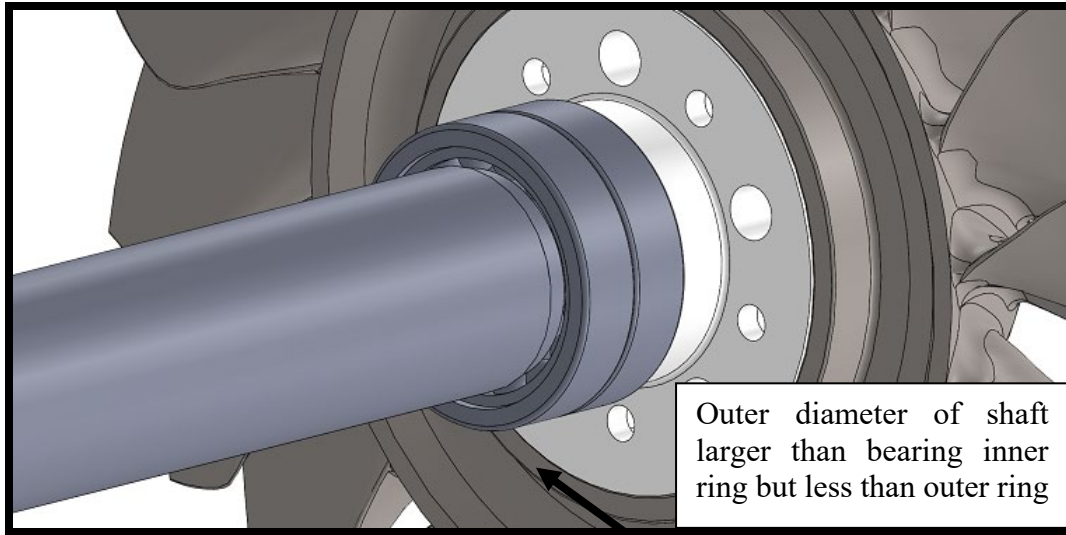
Rotor Shaft Insertion to Angular Contact Bearings.
